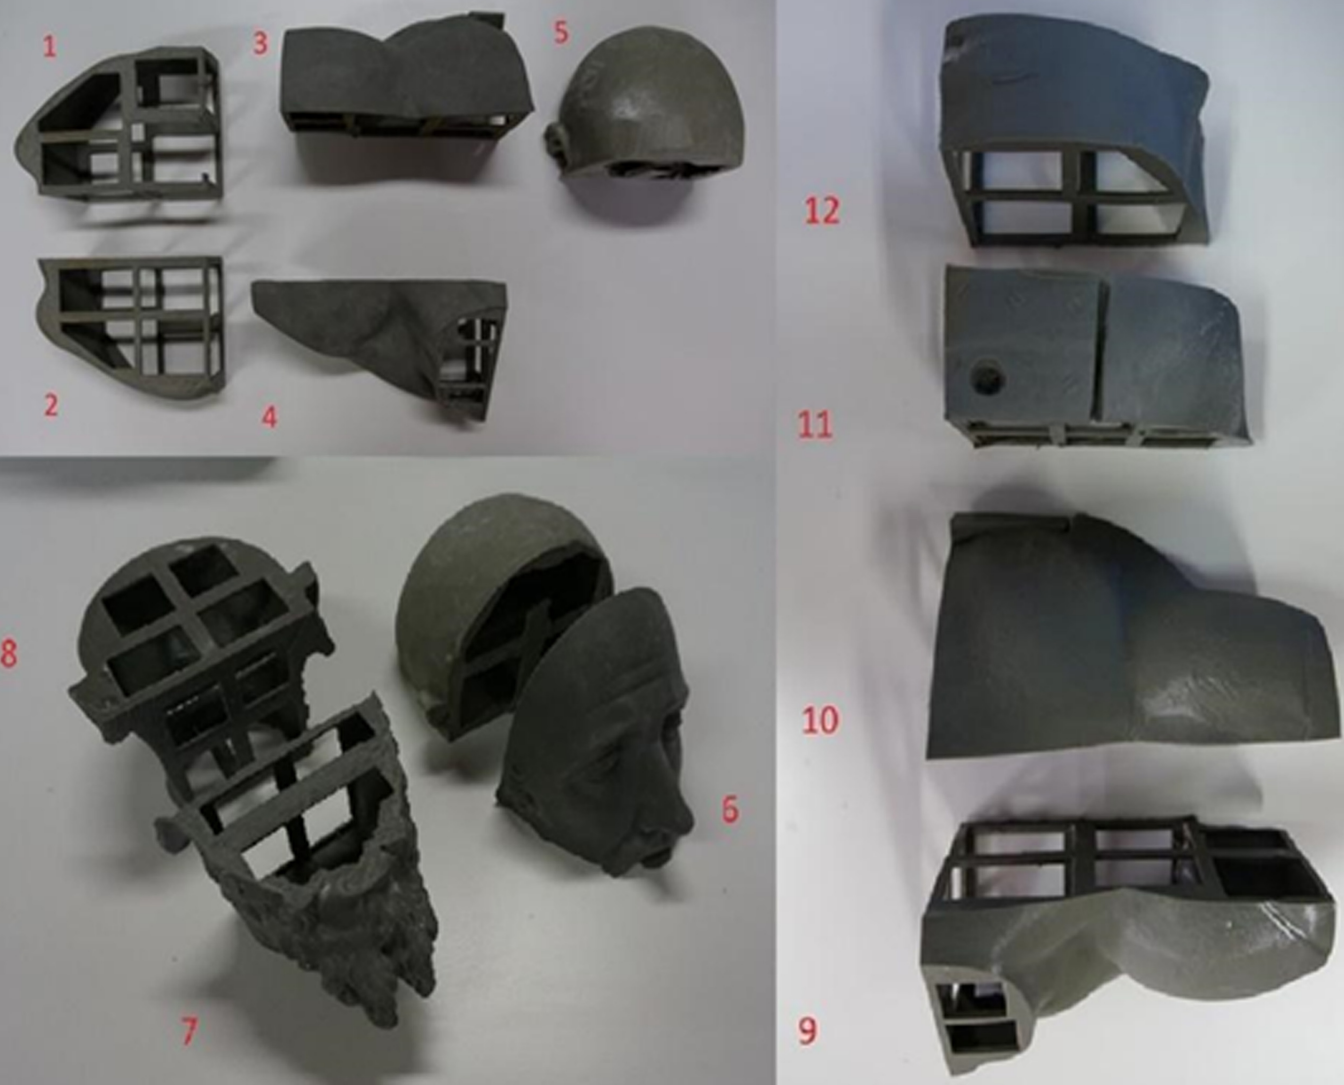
Printed diferents parts. Source: Own Elaboration. [Color figure can be viewed at wileyonlinelibrary.com]
